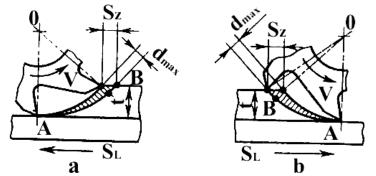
Conventional (up) (a) and climb (down) (b) milling: thick-ness of removed metal; d_{max} – maximum chip thickness; S_z – feed motion on one tooth of cutter
